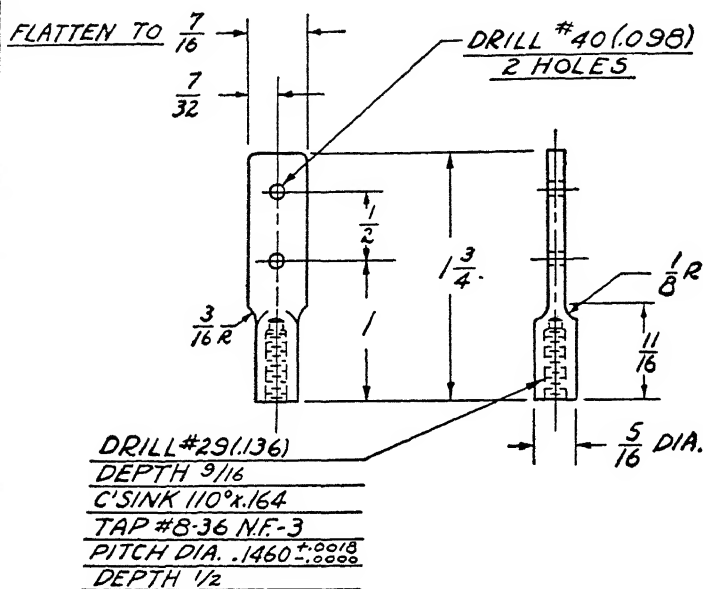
Front Landing Gear Fitting. Prob. 13-52.
